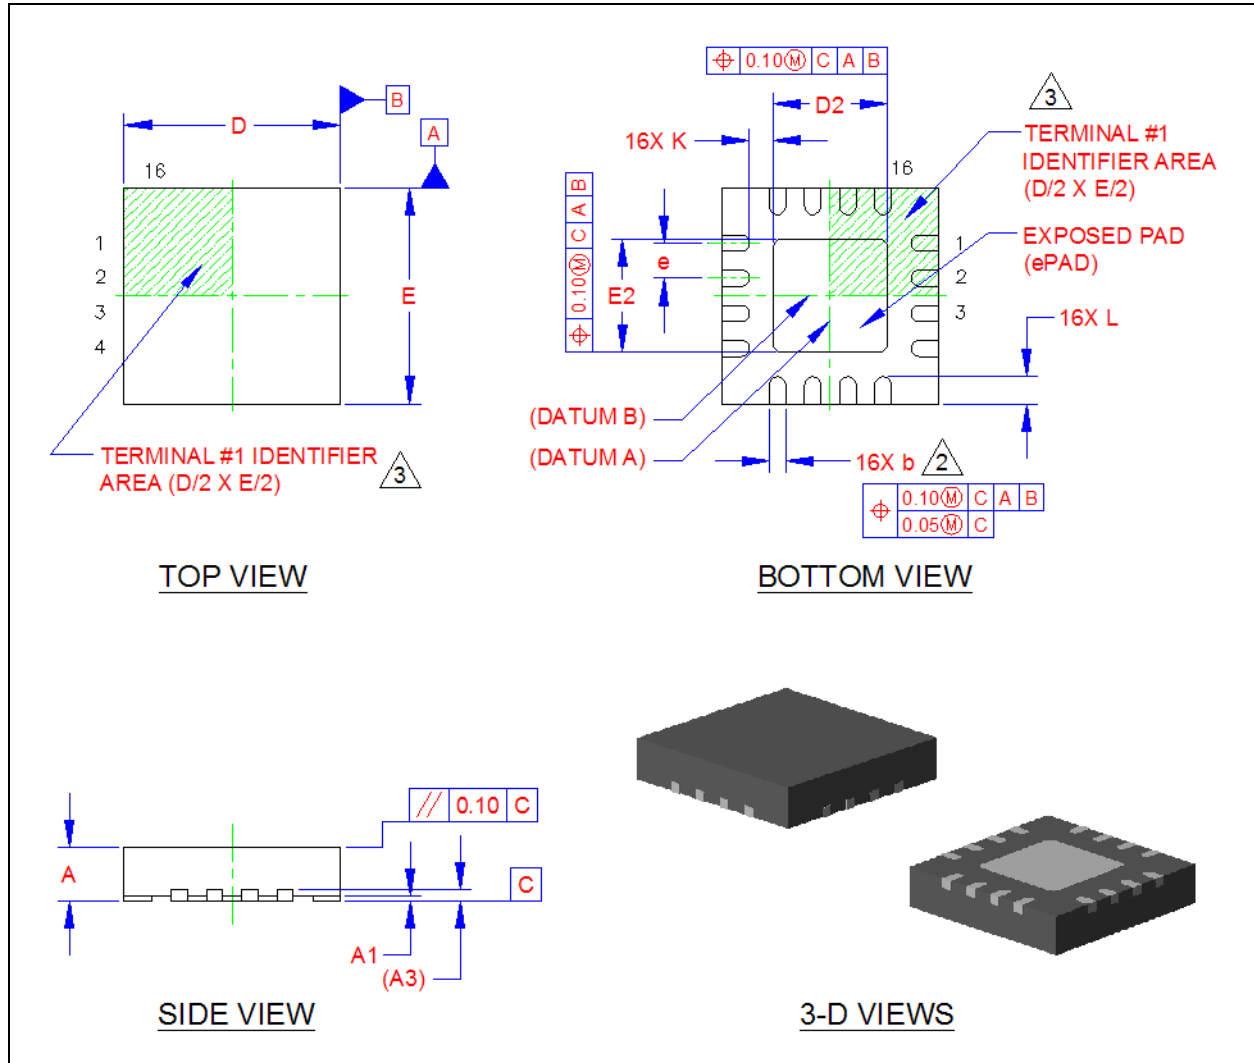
16-Pin QFN 4mm x 4mm Package Drawing
